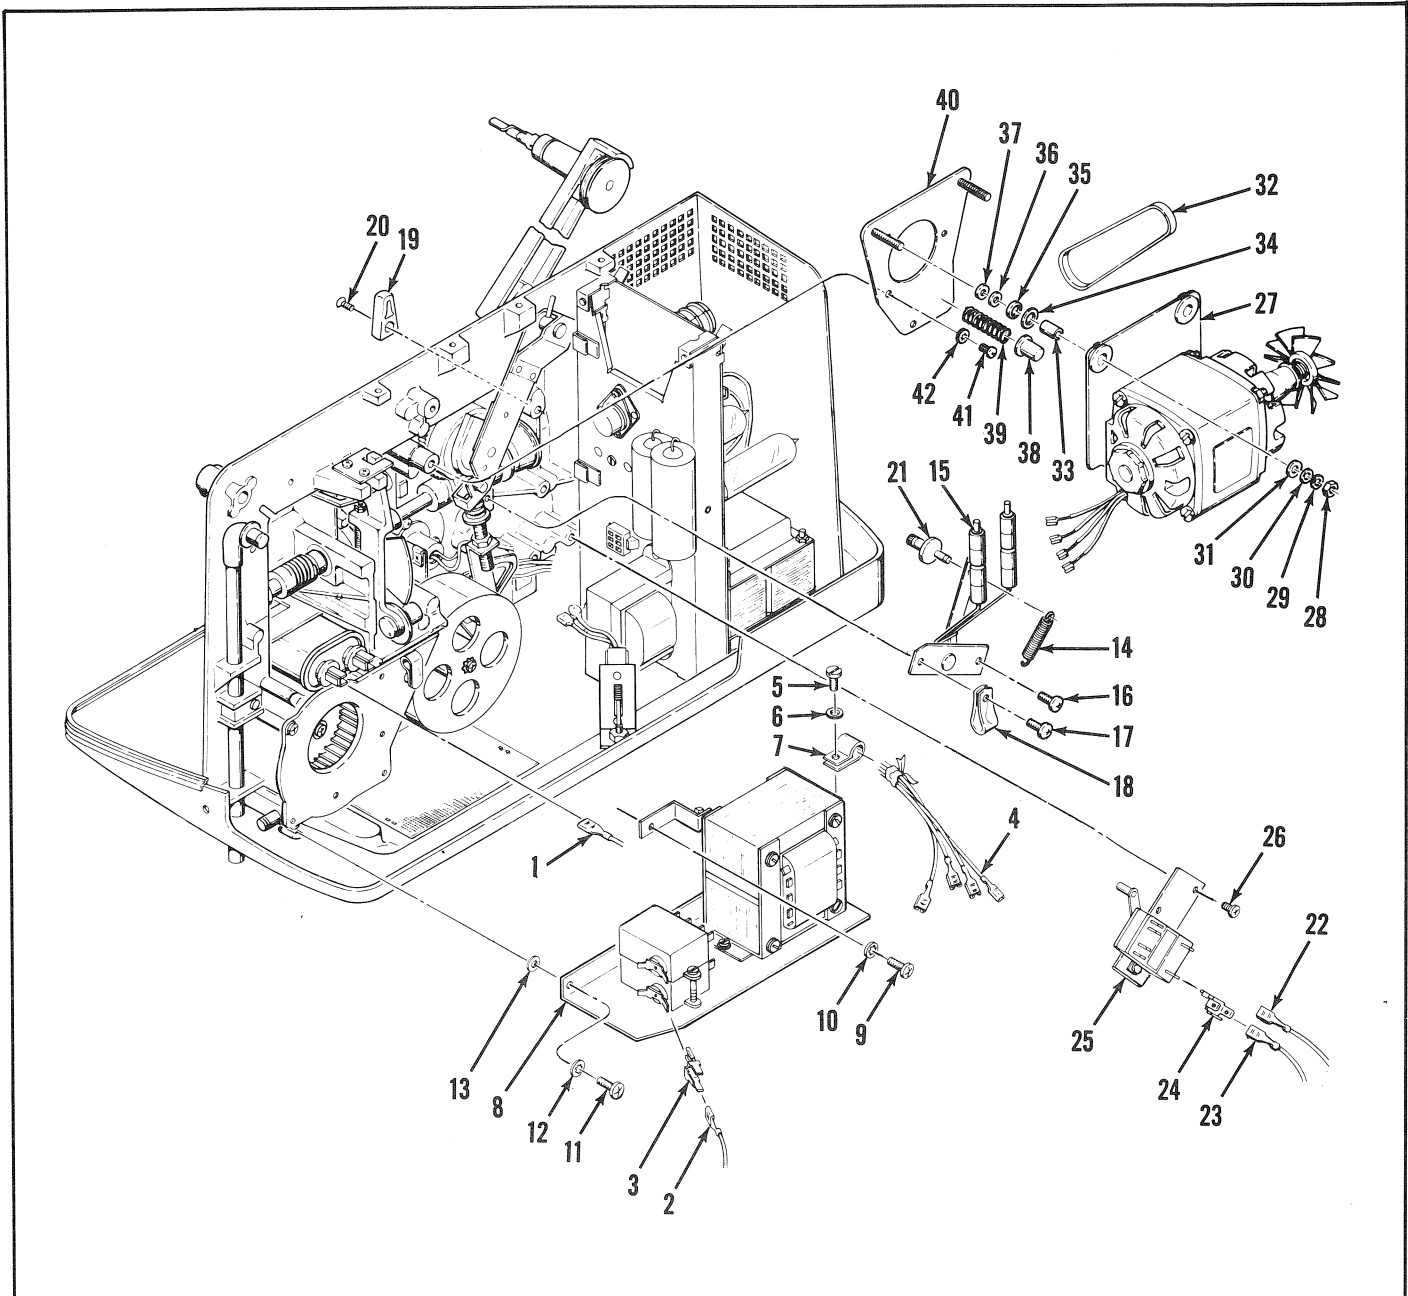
PROJECTOR ASSEMBLY (Cont.)
